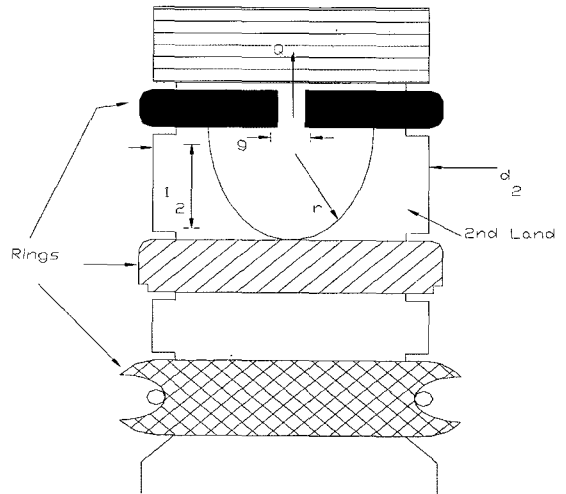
Side view of piston showing dimensions relevant to oil consumption.
